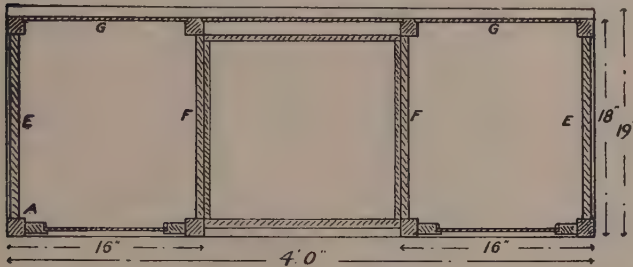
SECTIONAL PLAN (SCALE AS FIGS. 2, 3 AND 4).
